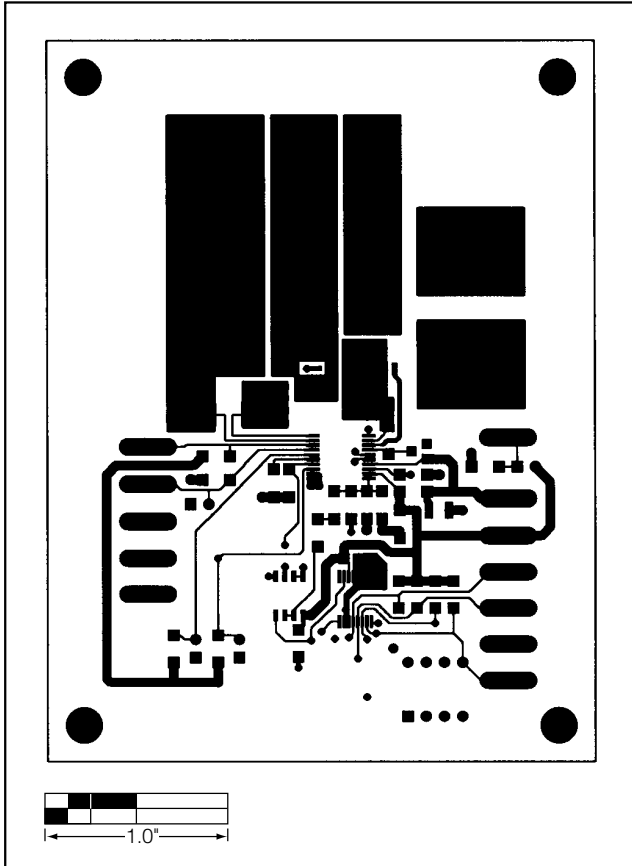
MAX1636 EV Kit PC Board Layout—Component Side
